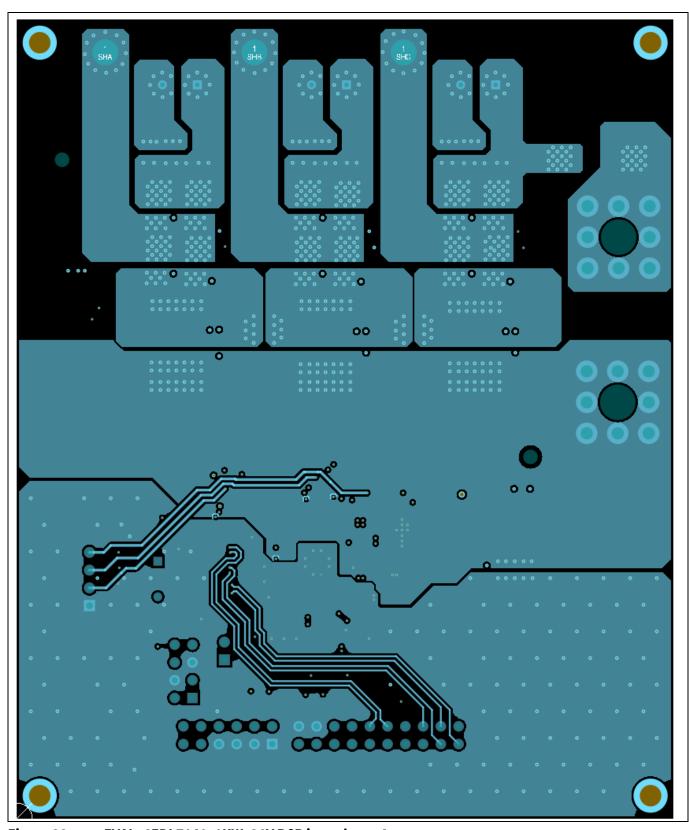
EVAL_6EDL7141_1KW_36V PCB inner layer 4
